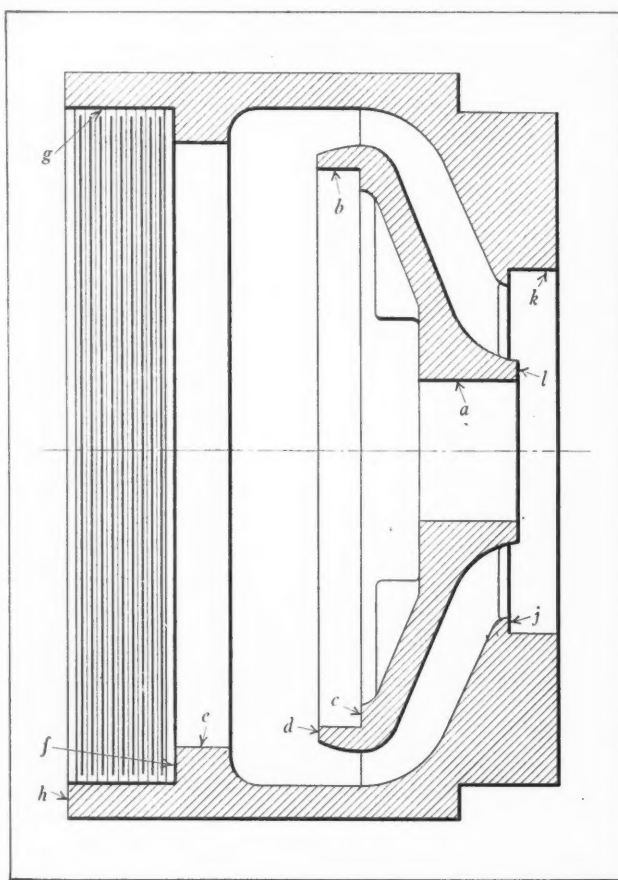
Pump Bowl which is Completely Bored and Faced by the Tools Illustrated in Figs. 2, 3 and 4
